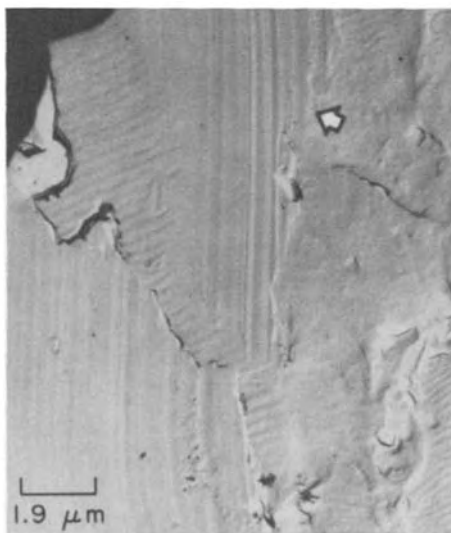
Rub marks (at arrow) on the surface of a fatigue fracture in aluminum alloy 7075-T6. 5400 \times . Source: Ref 4
